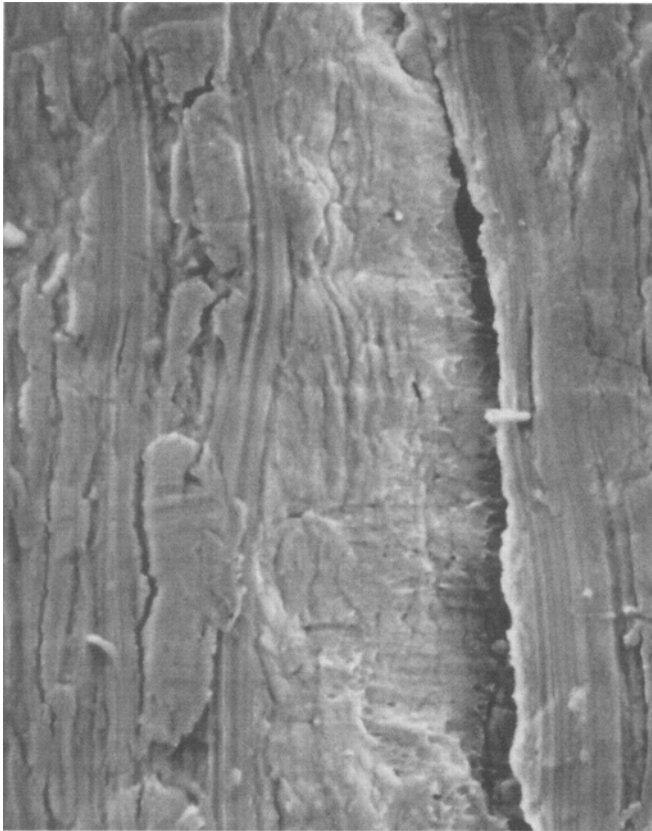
SEM fractograph showing deep crack on a 180° transverse bend specimen
